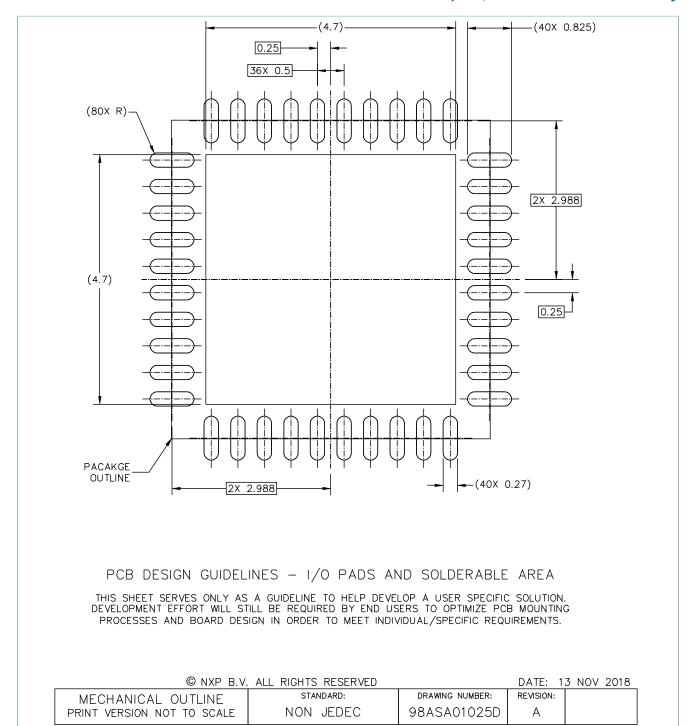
Reflow soldering footprint part2 for HVQFN40 (SOT618-13(DD))
